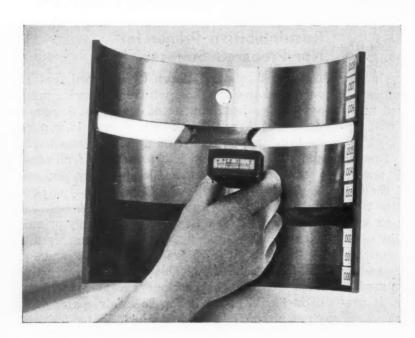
To check the concentricity of babbitt thickness in bearings, one of the bearings is occasionally bored in progressive steps varying 0.001 inch in height.
